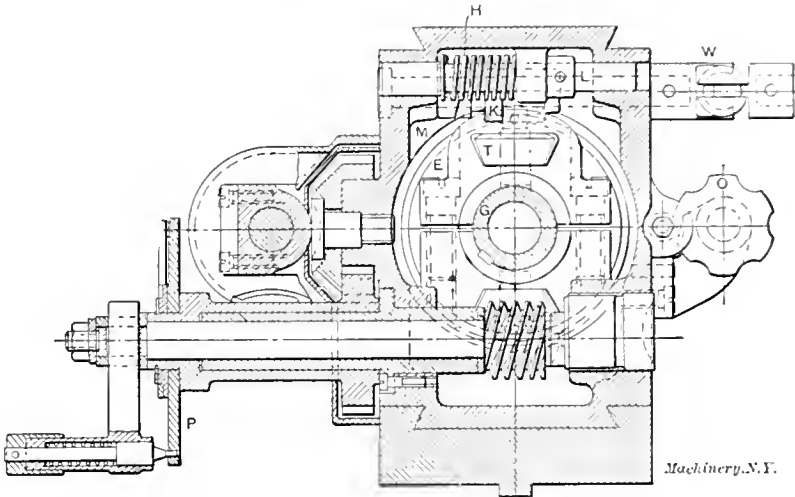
Detail of the Mechanism which indexes the Work when the Locking Bolt is withdrawn and the Gear E is Free to revolve
